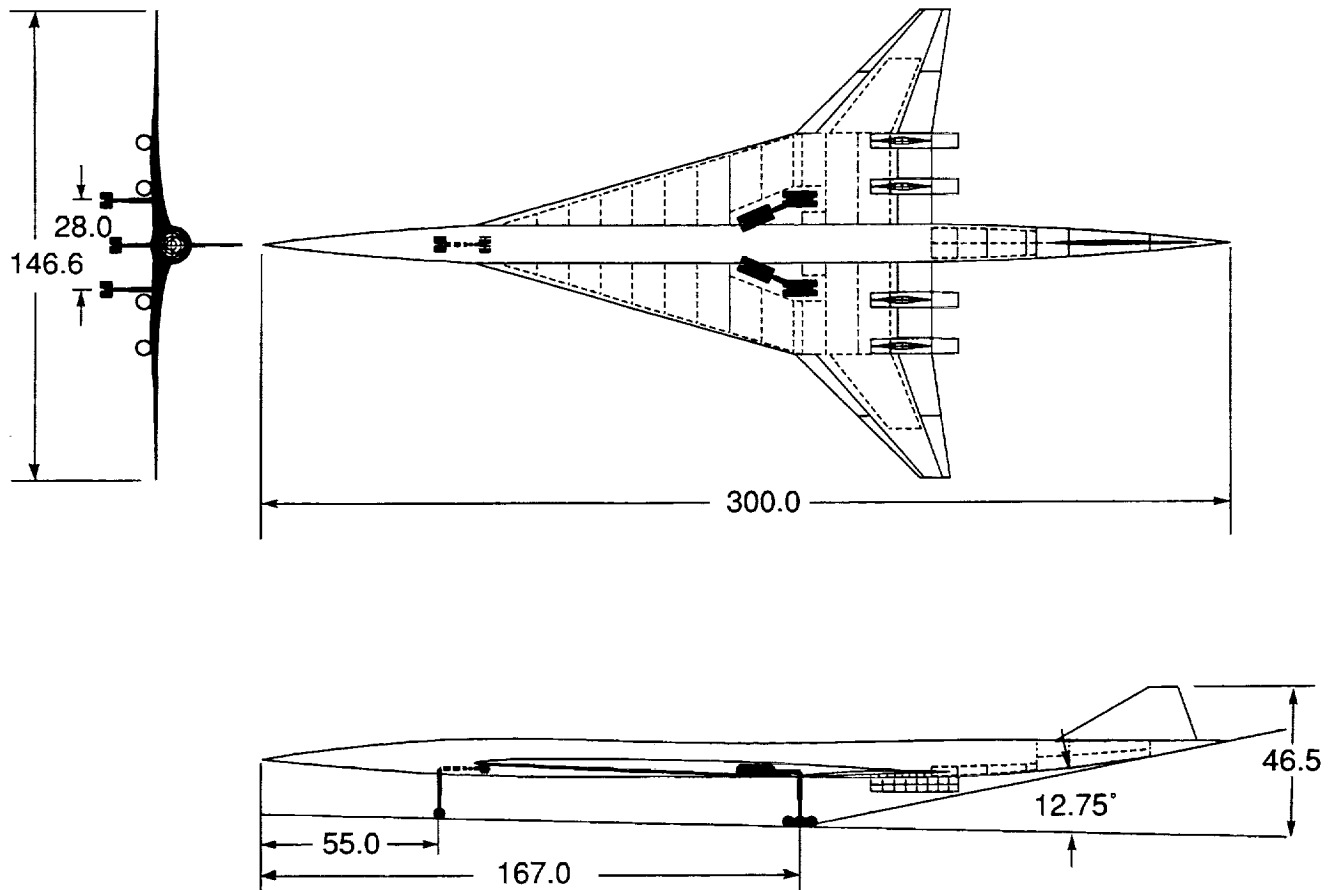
Three-view drawing of Mach 2.4 configuration. Linear dimensions in feet.
